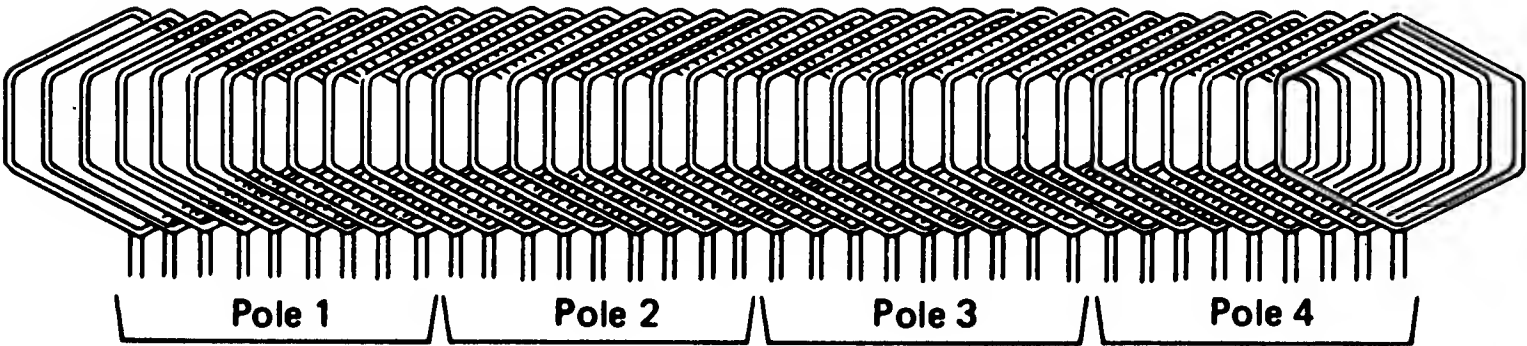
The true shape of coils shown in Fig. 3-43.
